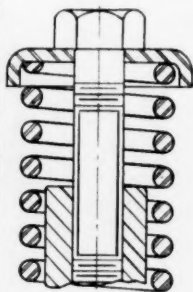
In this design, a formed sheet steel cap is used for centering the compression spring at the outside diameter.
